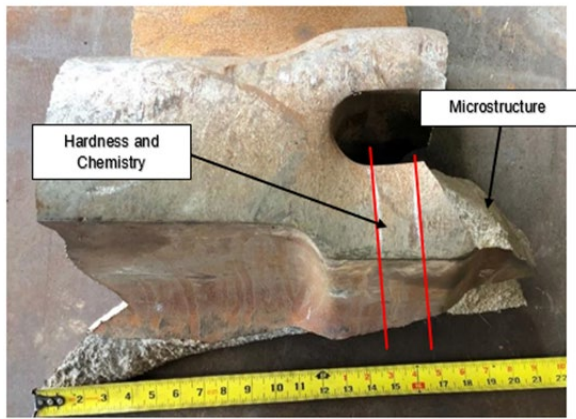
Image of white iron casting where fracture occurred. Casting had to be broken open to expose the fracture face.
